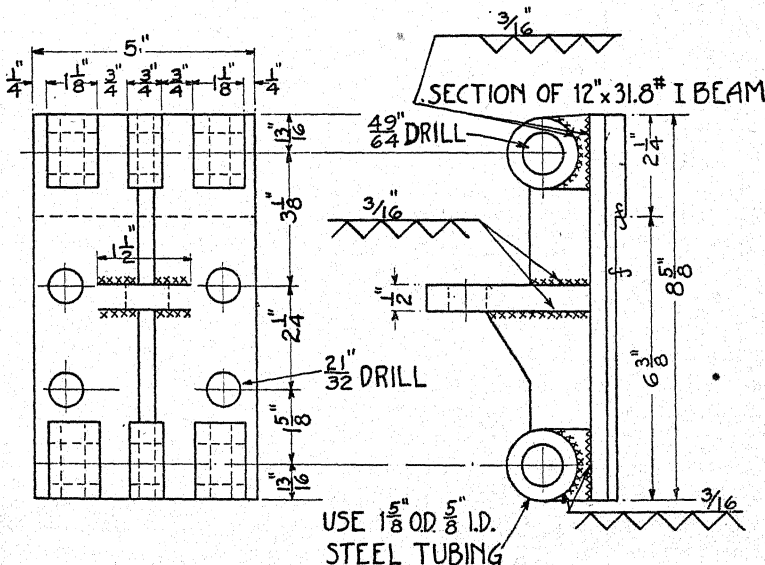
Base for attachment of brake levers arc welded for two-thirds the cost of a steel casting.
